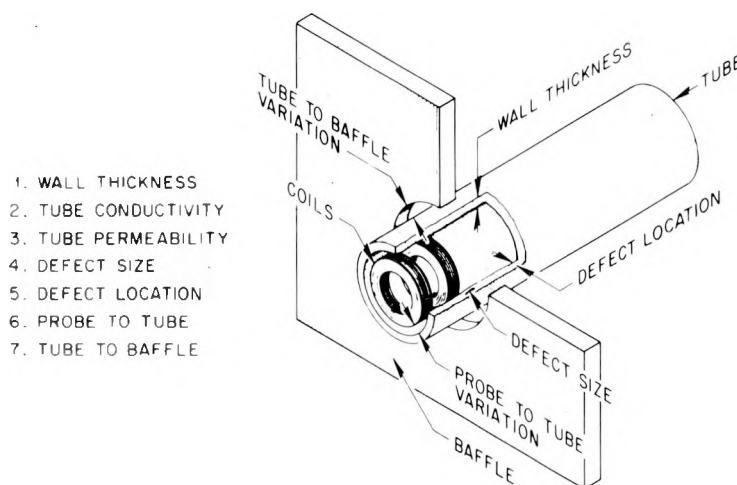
Eddy-Current Inspection of the Bore of Steam Generator Tubing.
